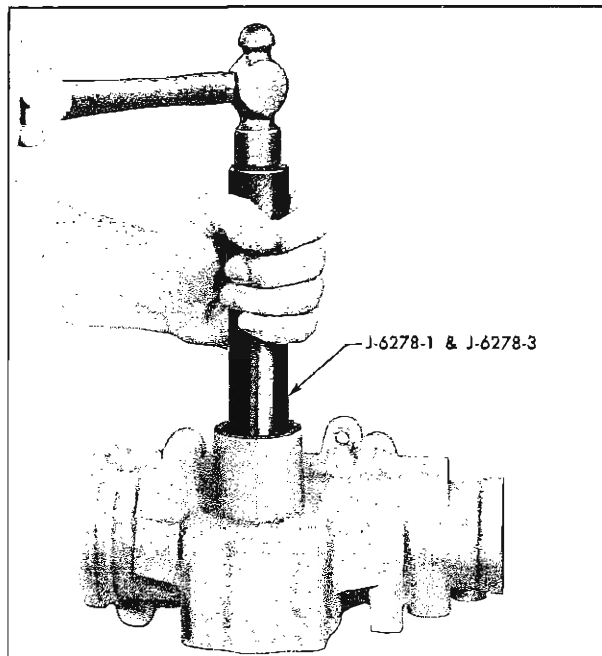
A-22 Installing Pitman Shaft Needle Bearing
